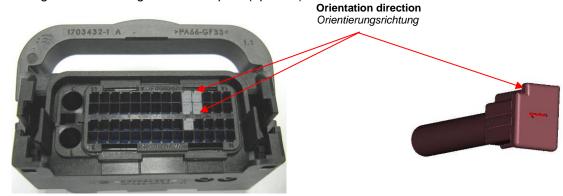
disassembly of the MCON 1.2 contacts / Demontage der MCON 1.2 Buchsenkontakte
